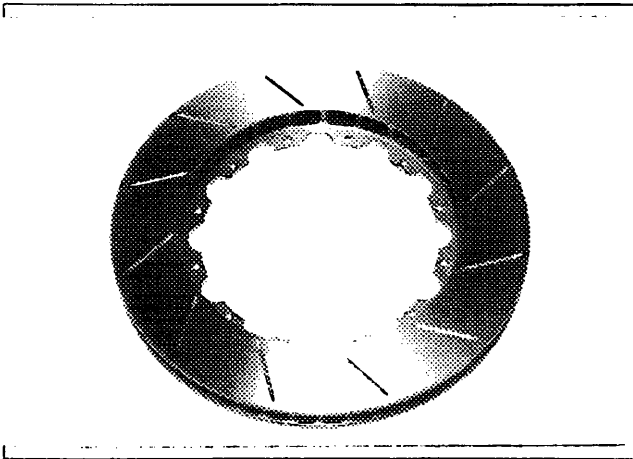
FRONT AND/OR REAR BRAKE DISC
